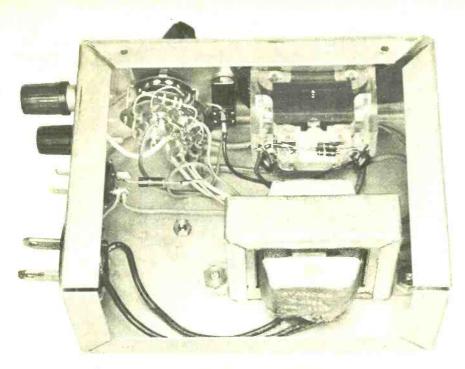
Photo shows inner assembly of the prototype. All parts are installed by point-to-point wiring so it is not necessary to use circuit board.
